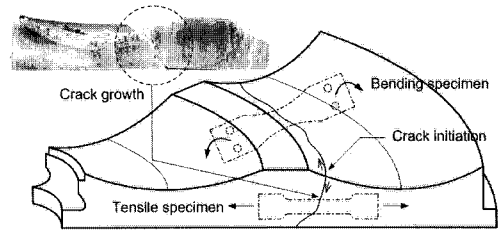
Sampling direction of tensile and bending specimen and fracture process of table liner
